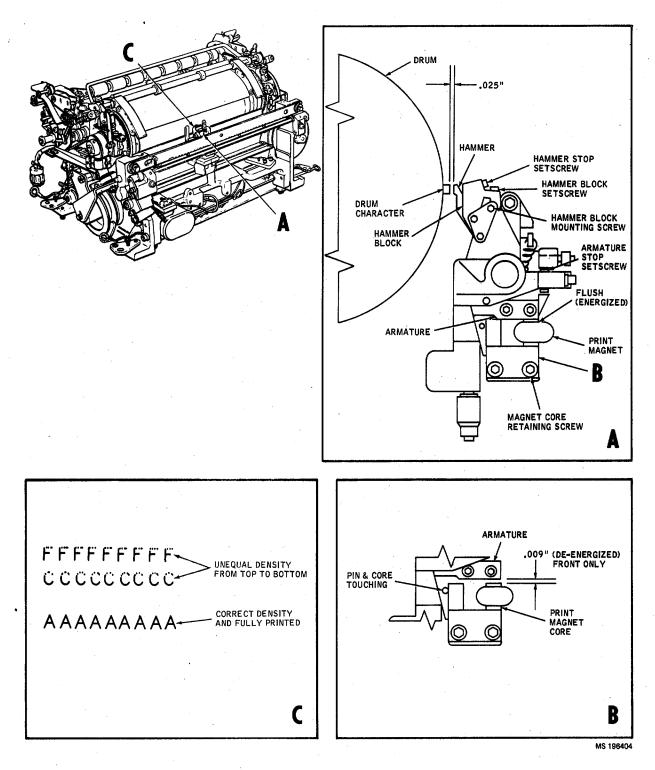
Print Hammer Magnet Clearance Adjustment
